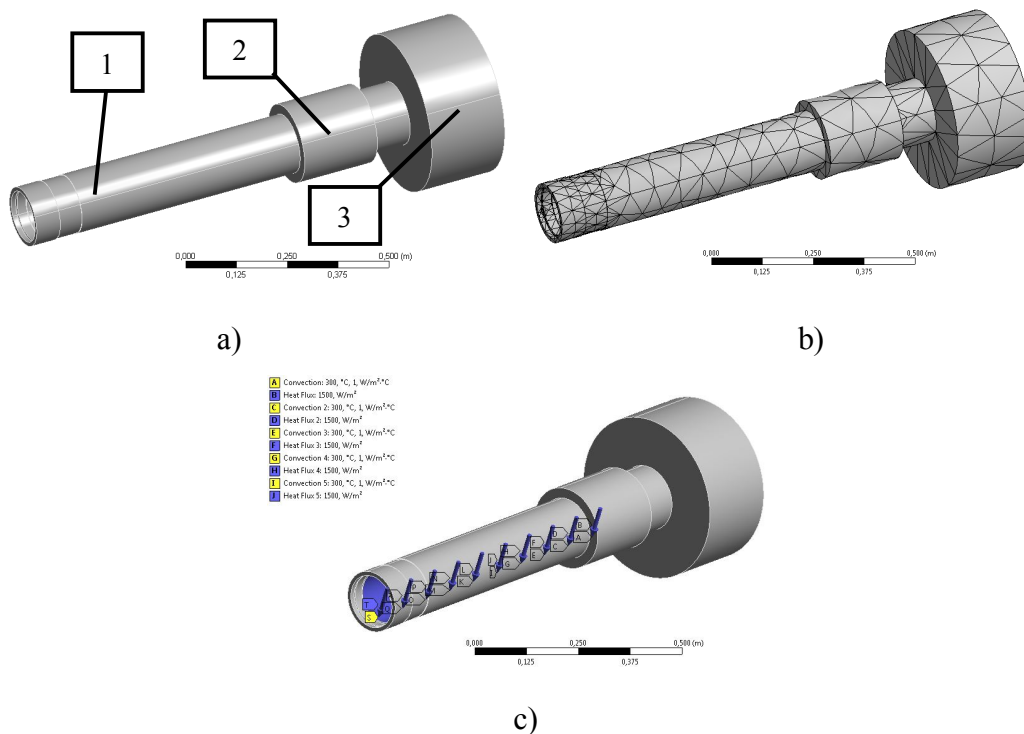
Stages of model development: a) 3D model of a sleeve: 1 – sleeve; 2 – bushing of spraying installation; 3 – flange, modeling heat capacity of the fixture and machine-tool; b) division of the piece into finite elements; c) scheme of heat embedding
